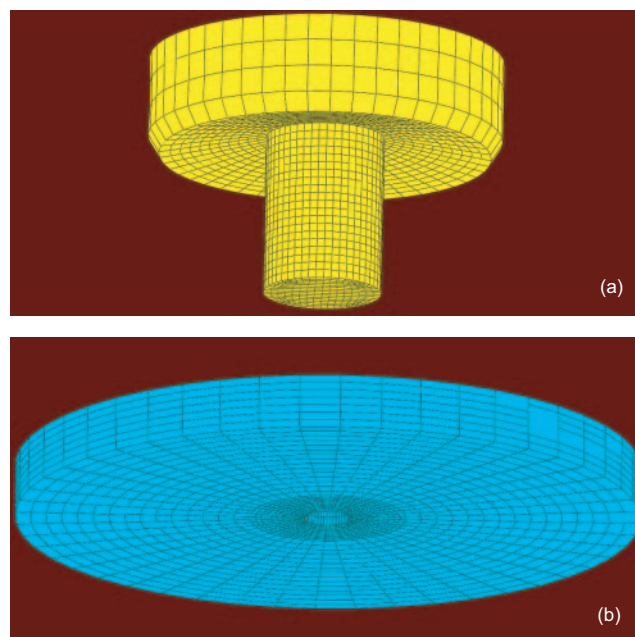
Meshed models for (a) the FSW tool and (b) the FSW workpiece
